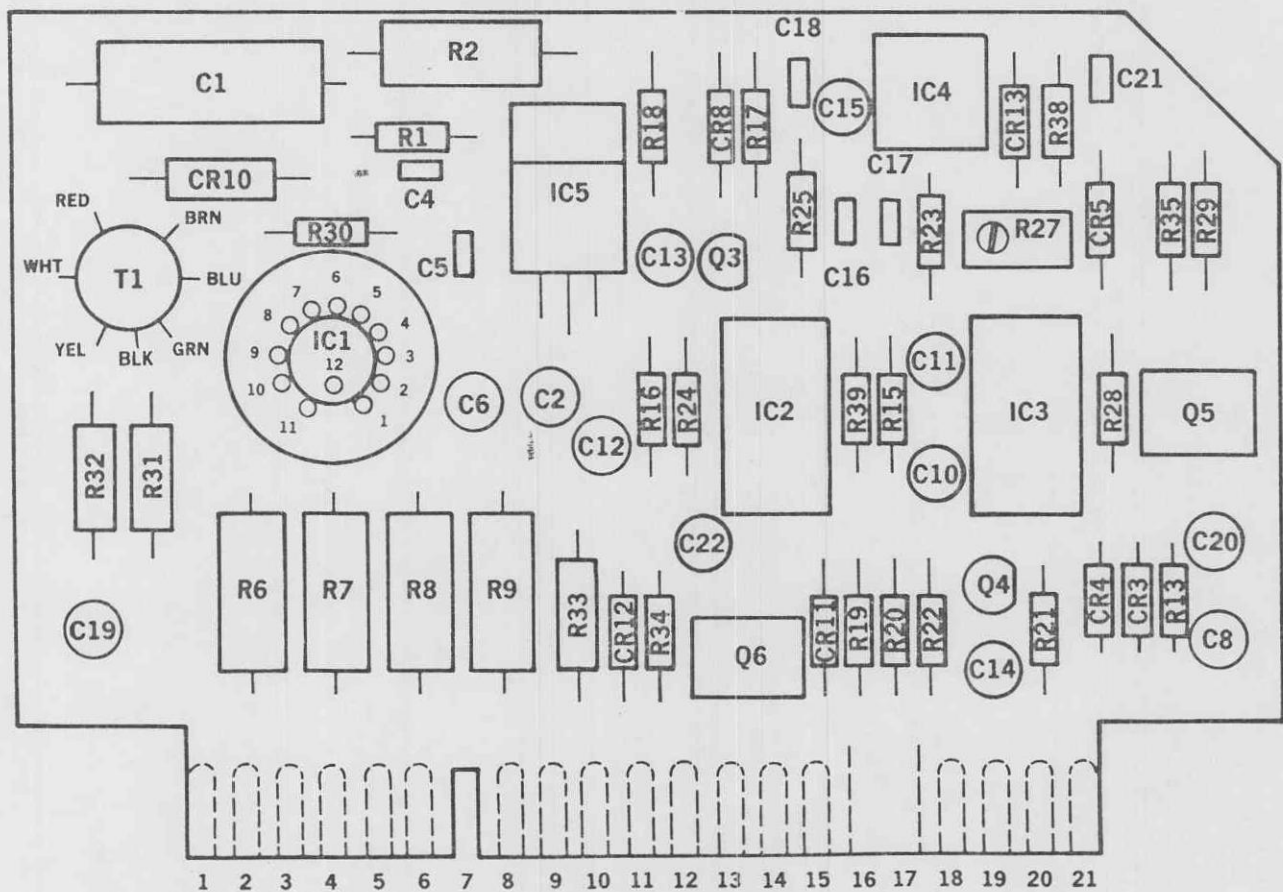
PRINTED CIRCUIT PARTS LOCATION
